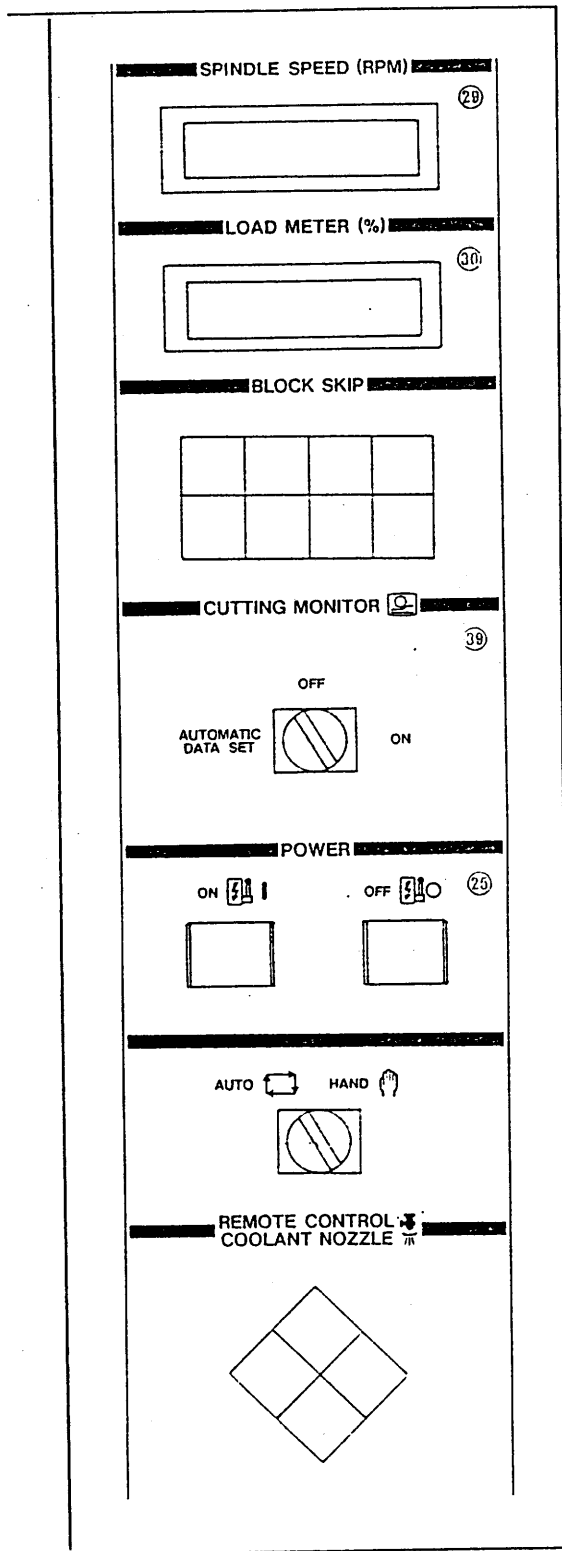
Auxiliary operation panel (I)--- Spindle tool clamp/unclamp
